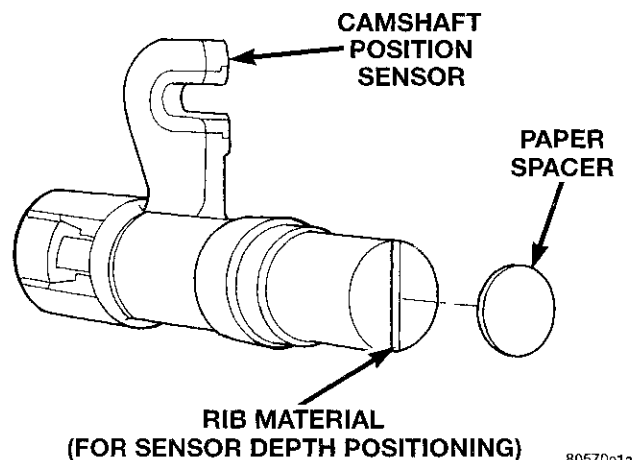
Sensor Depth Positioning Rib—8.0L V-10 Engine
